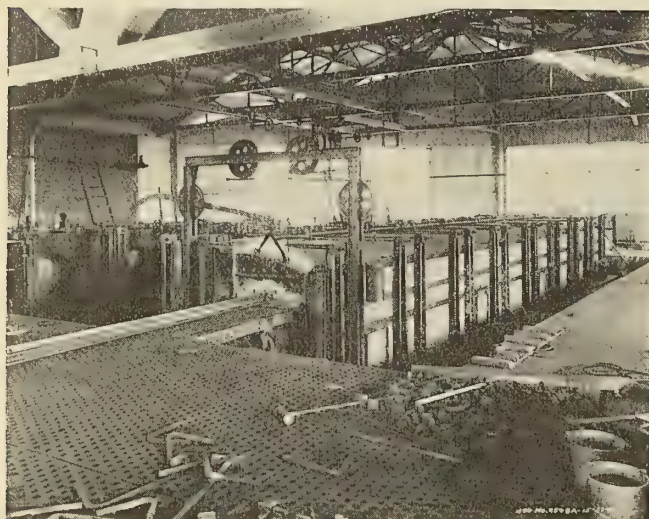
Furnaces in Plate and Angle Shop, South Yard
